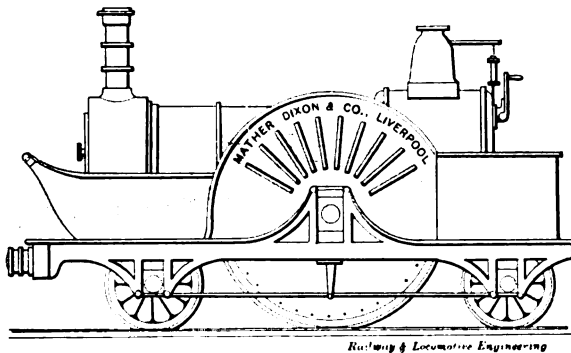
Early Great Western Locomotive, with Driving Wheels Ten Feet Diameter and Wind-Splitting Front End
